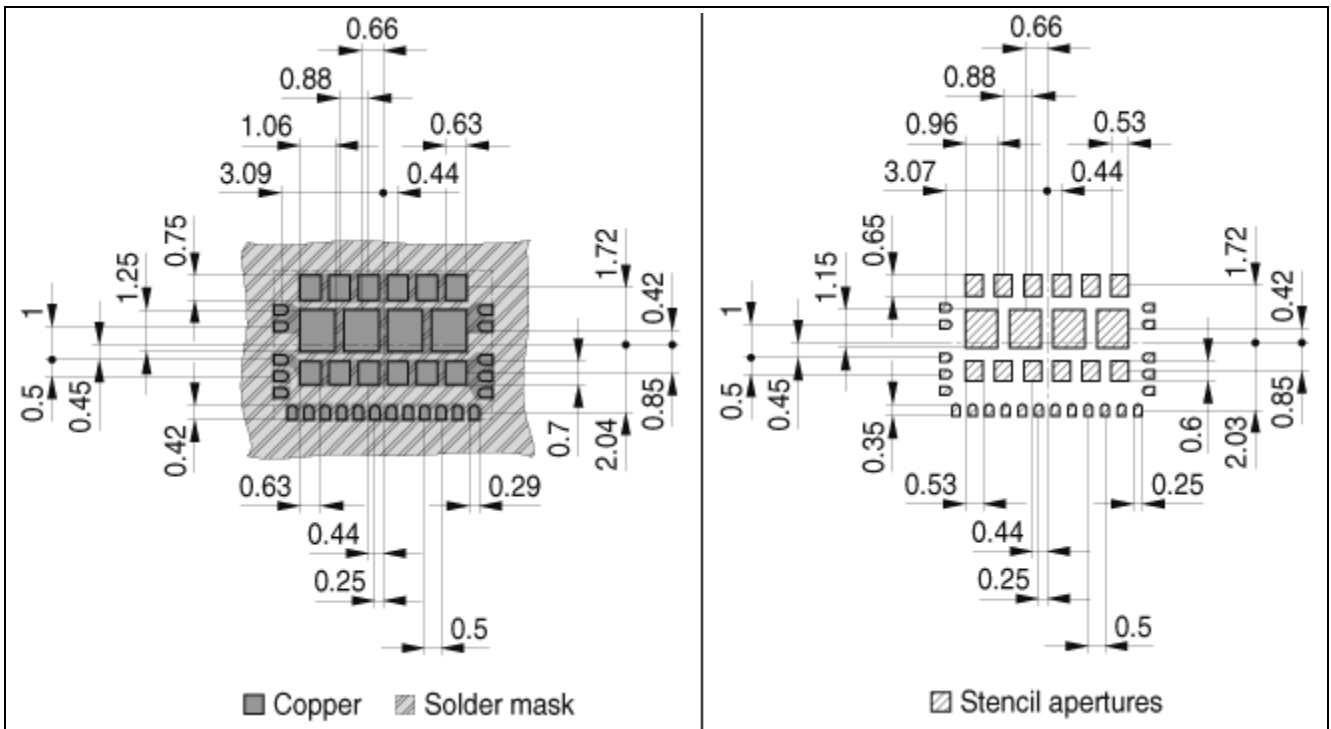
Landing Pattern and Stencil Dimensions (SW on upper end) in mm
